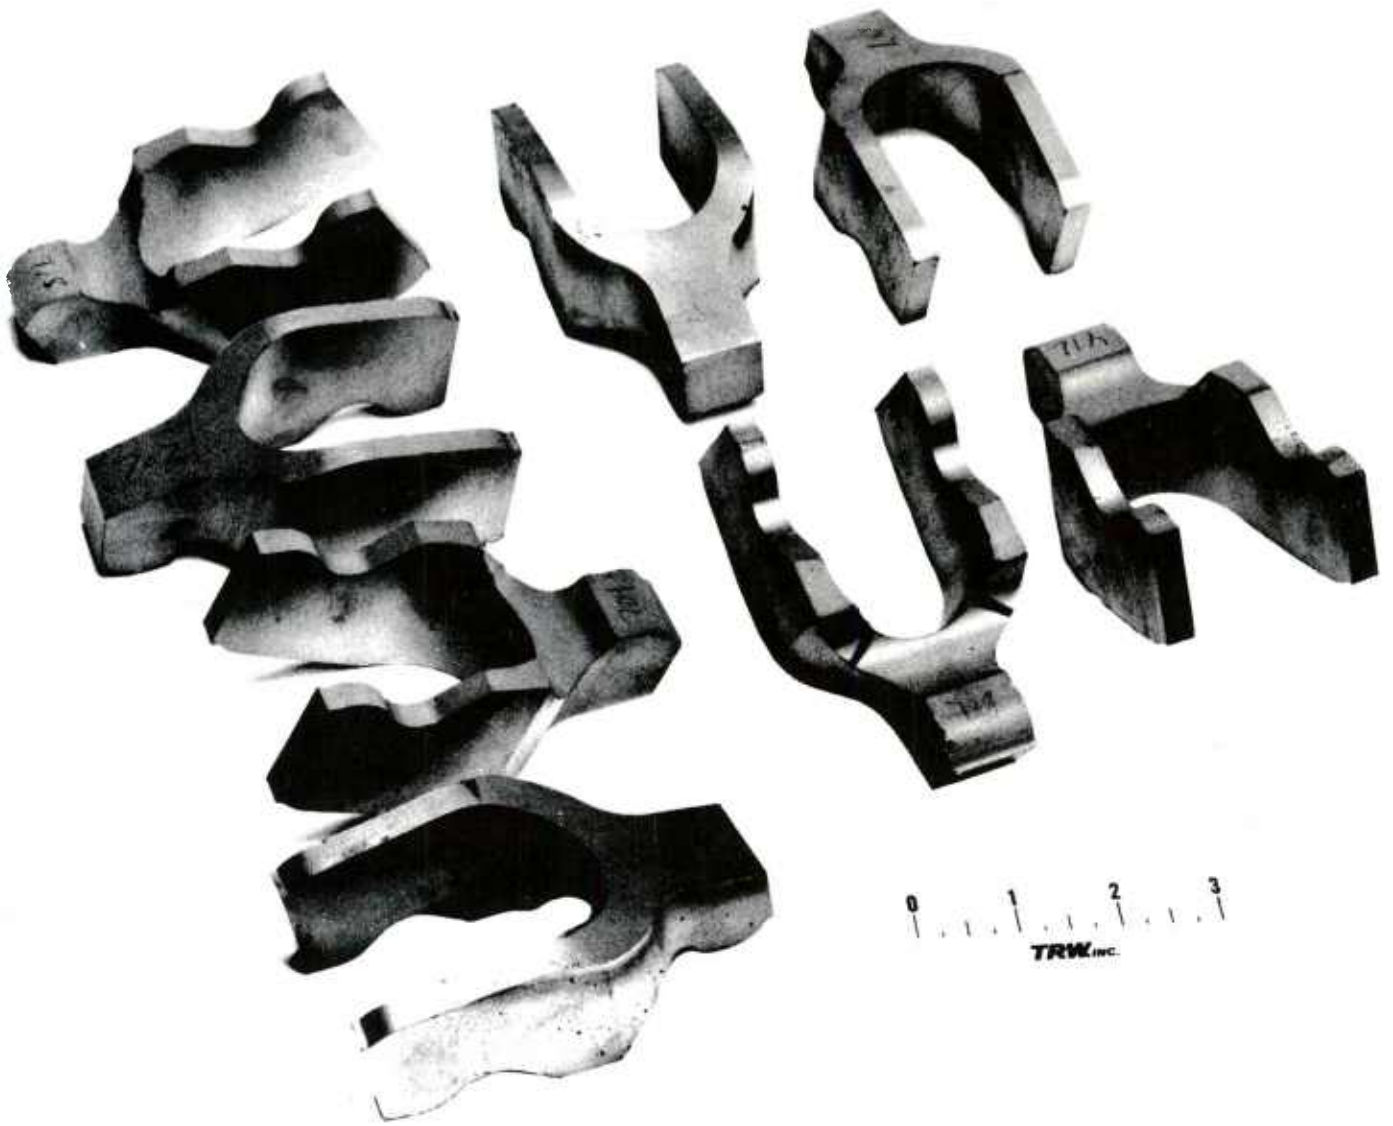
As-Sintered Preforms Used in P/M Forging of Accelerators.
